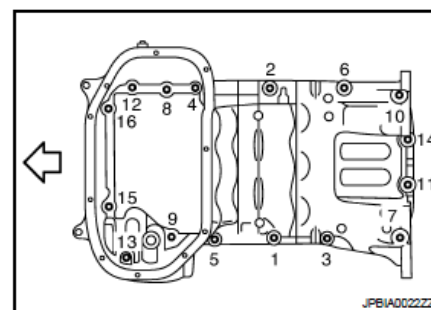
Identifying Oil Pan Mounting Bolts Tightening Sequence
